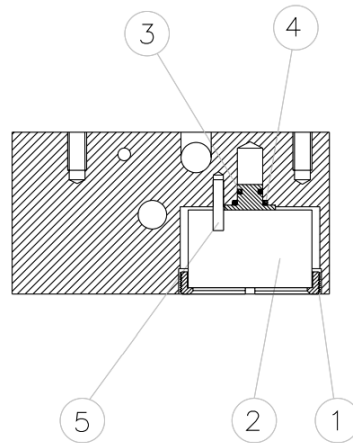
PRESSURE GAUGE INSTALLATION
